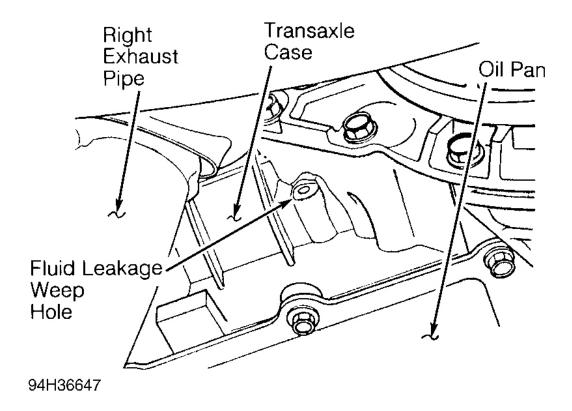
Identifying Fluid Leakage Weep Hole Courtesy of CHRYSLER LLC
